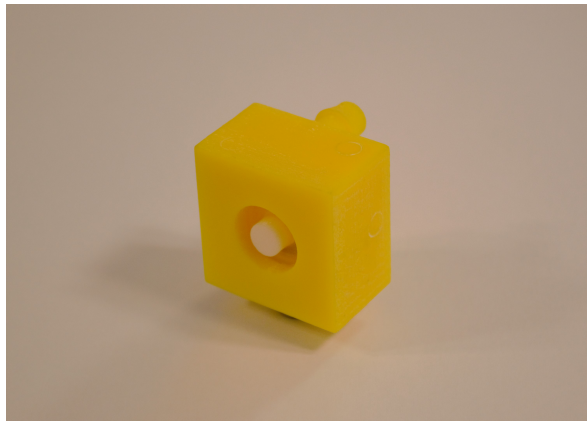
Photograph showing one of the finished prototypes that were printed using the material jetting printing process.
